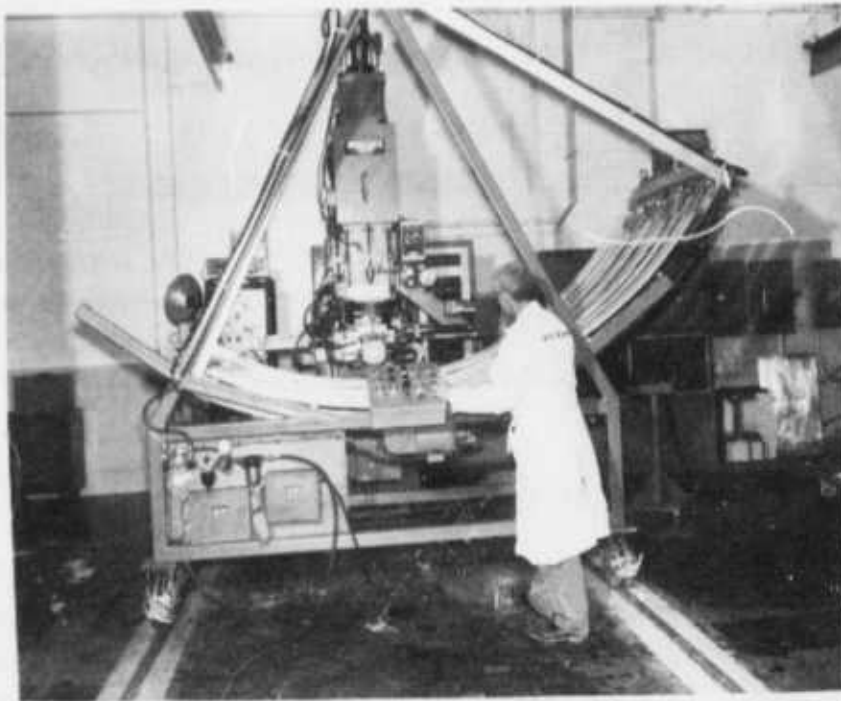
SPOT-WELD POSITIONER IN OPERATION AT
